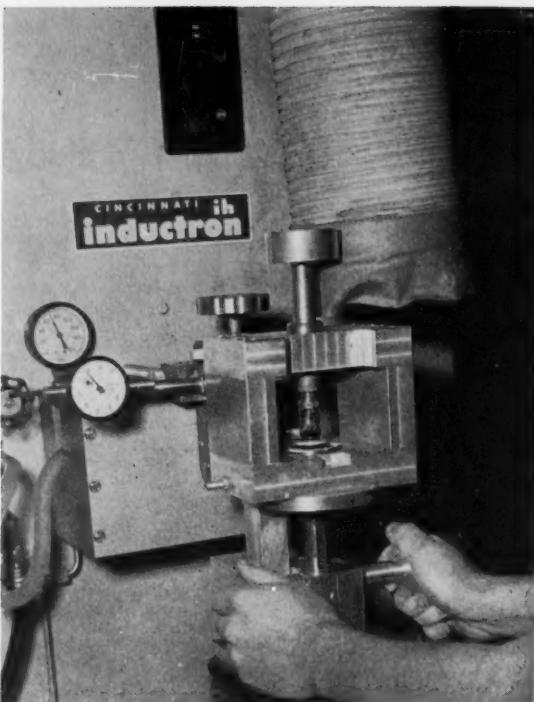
Precise control and fast heating on Cincinnati Inductron permits successful brazing of assembled transducers. Transducer being positioned for brazing is a precision pressure type.
